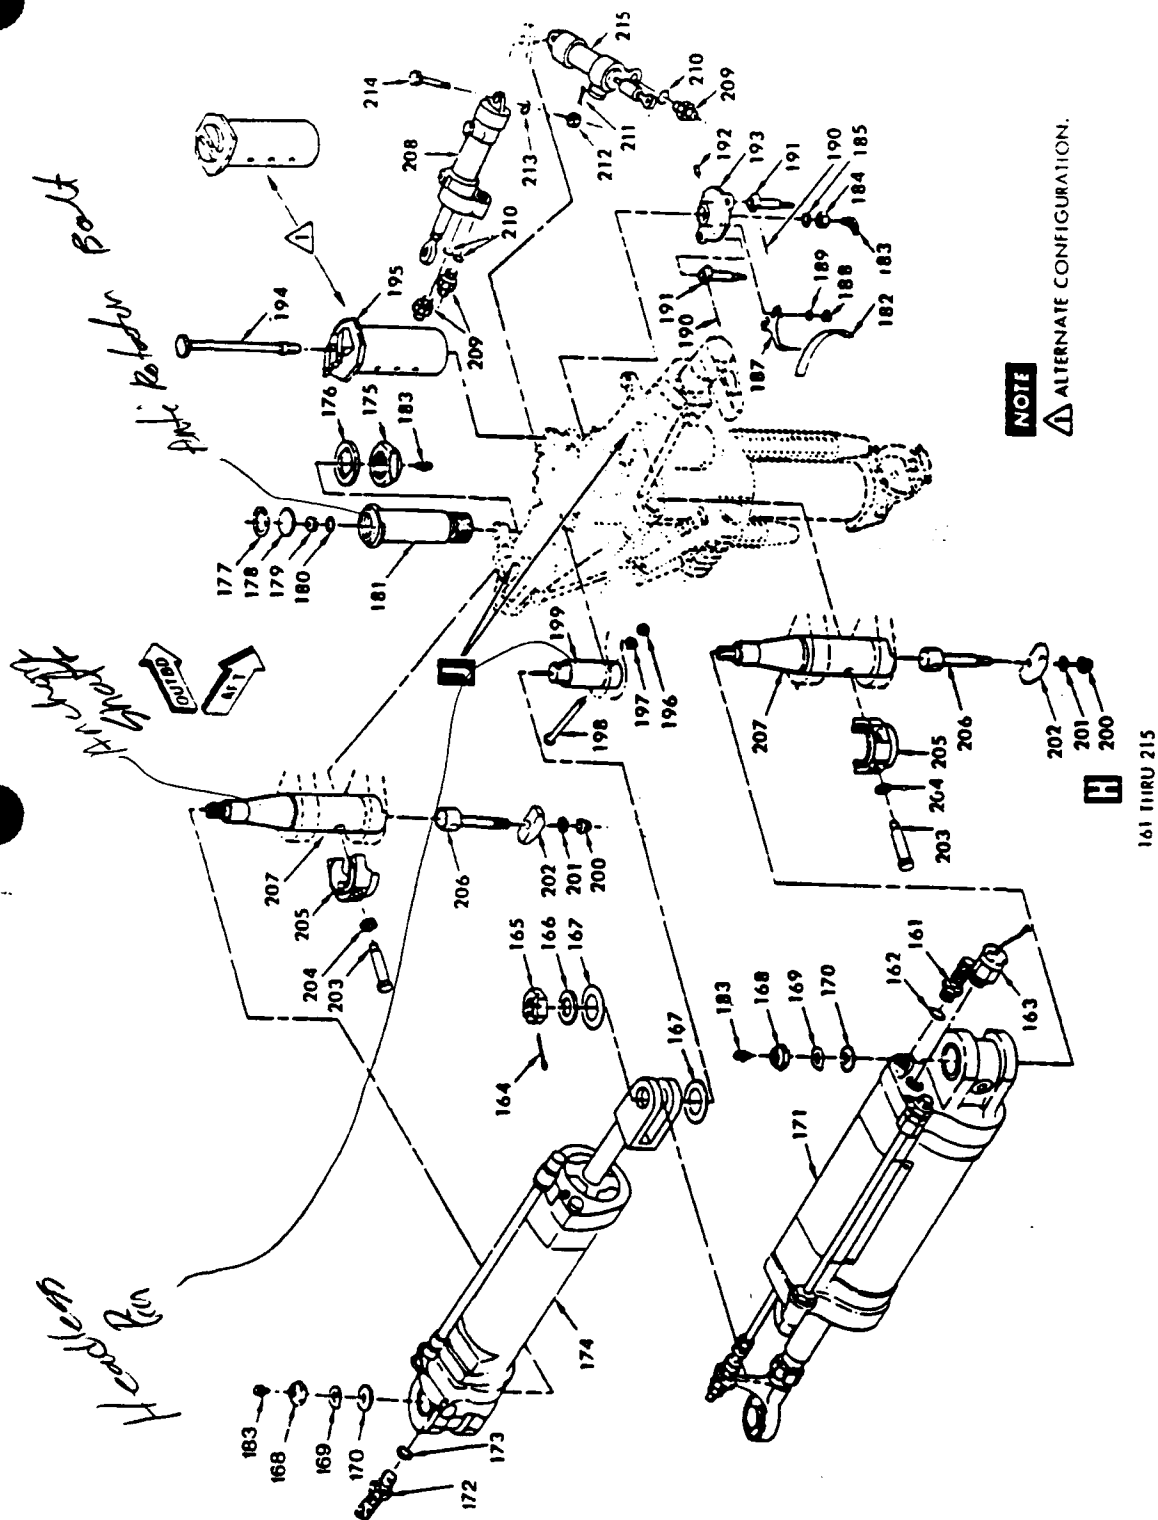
RH Aft Strut Assembly (Sheet 6 of 18)
